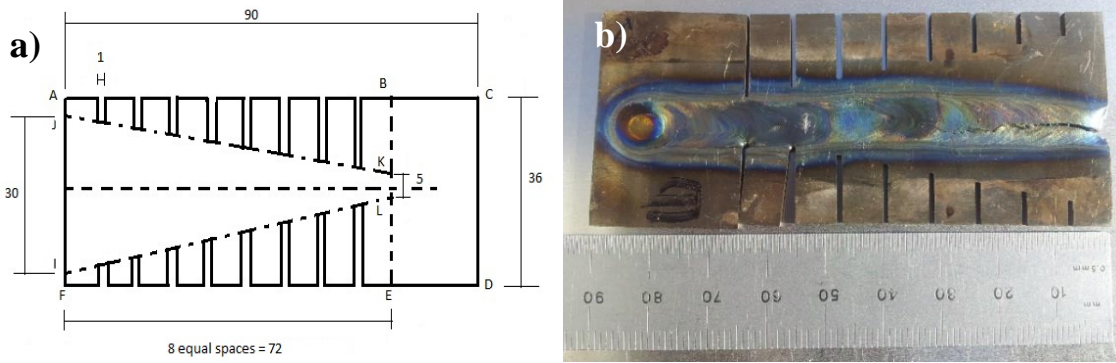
a) A schematic Houldcroft sample and b) a cracked Houldcroft sample after welding at 6 mm/s.
